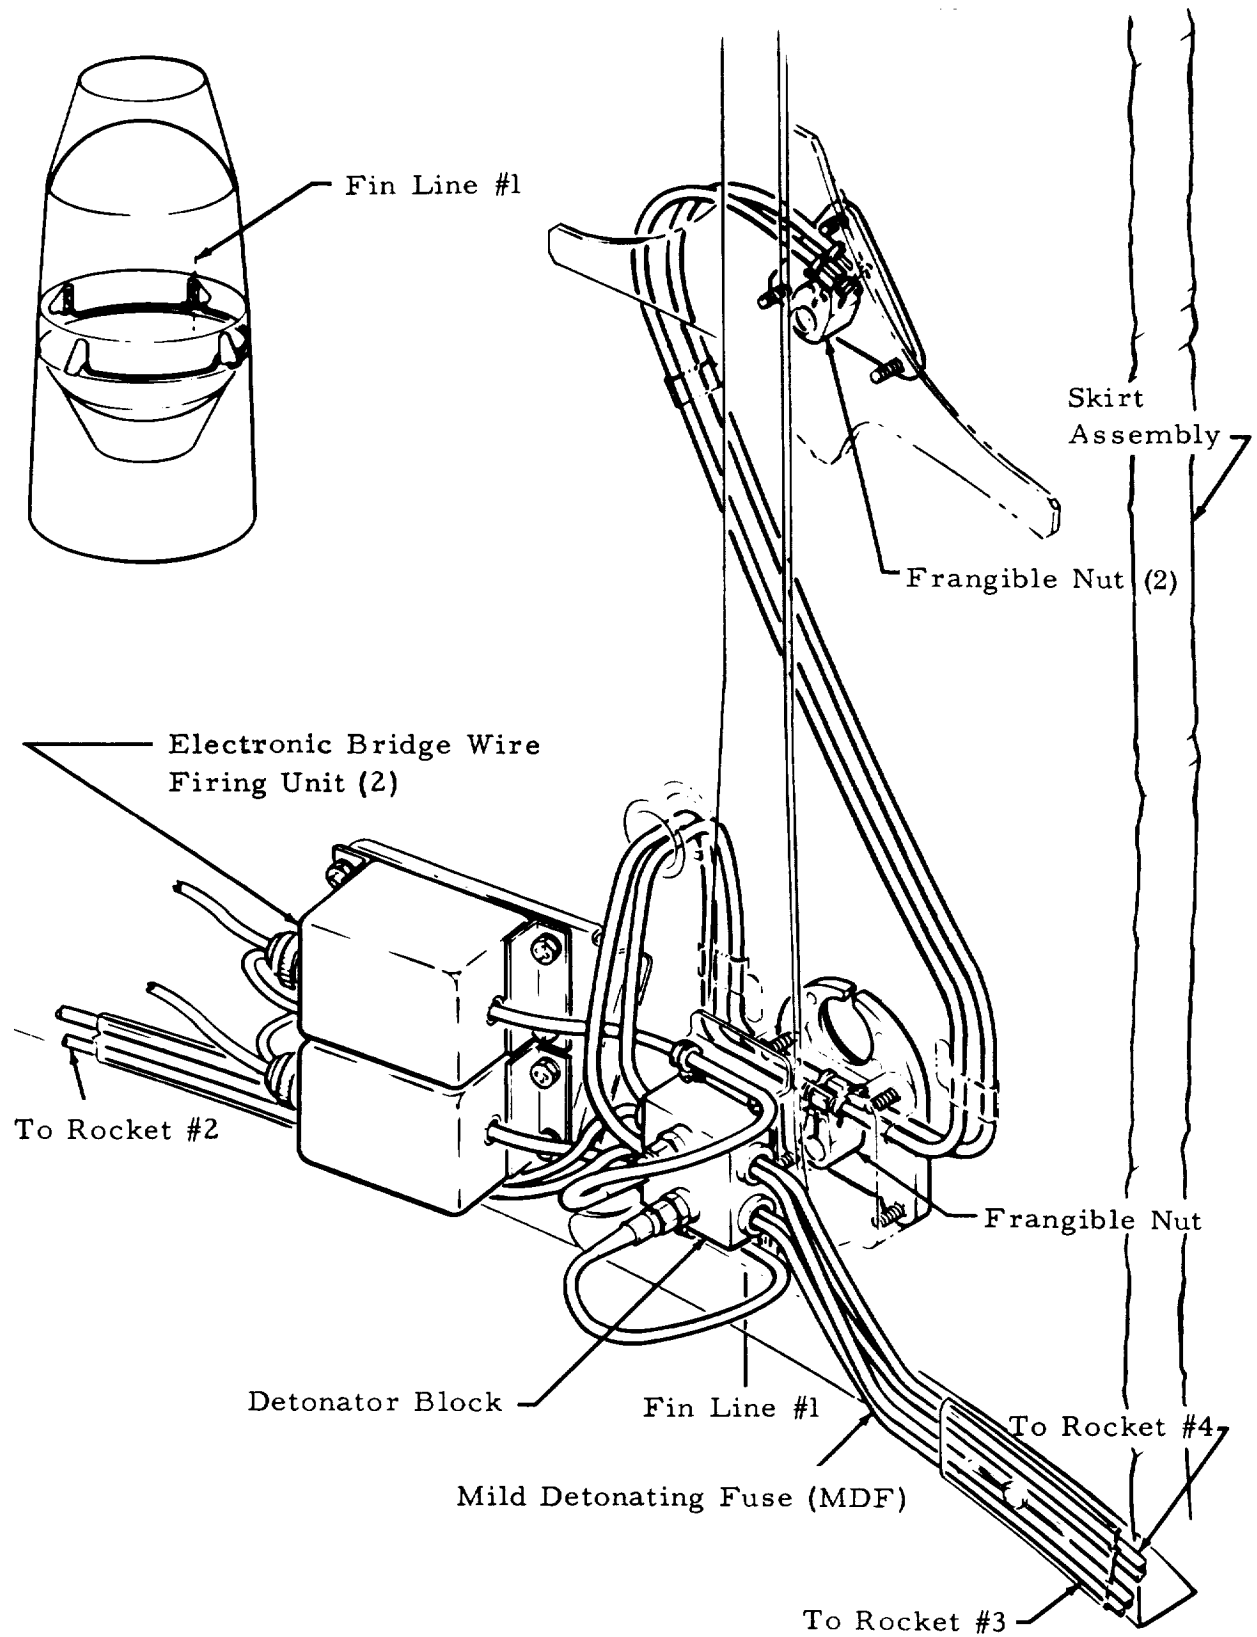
Frangible Nut and Explosive Charge Assembly
